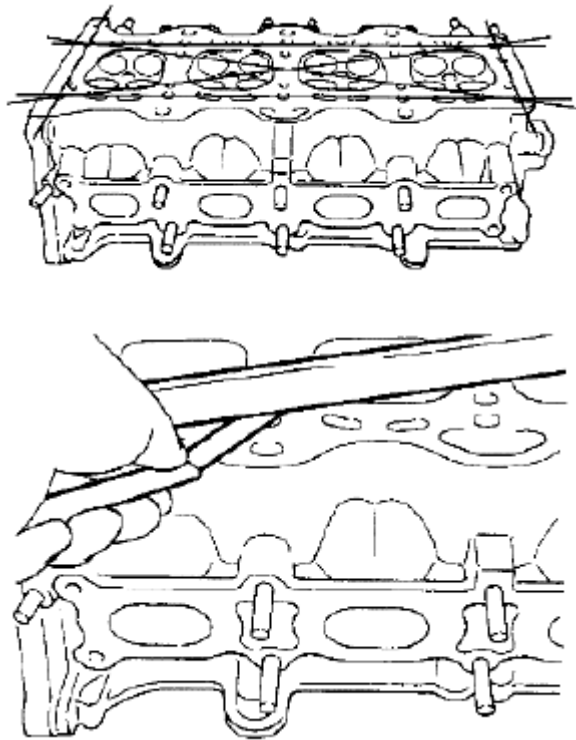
Checking Distortion For Cylinder Head Surface On Piston Side
